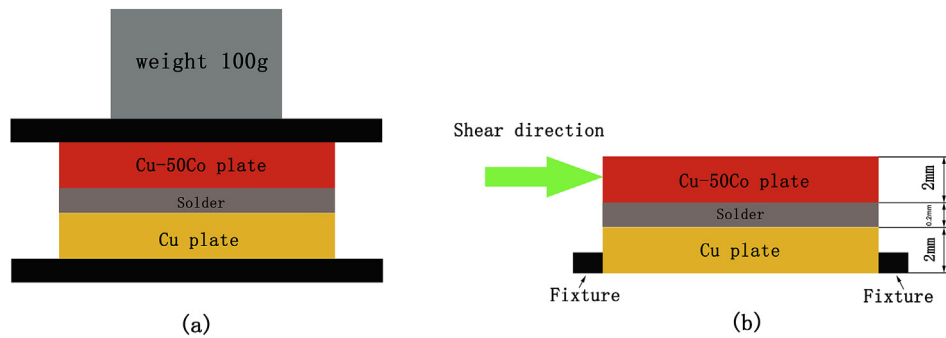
(a) Installation instruction of Cu/SAC305/Cu-50Co solder joint, (b) sketch of the Cu/SAC305/Cu-50Co solder joint shear sample.
